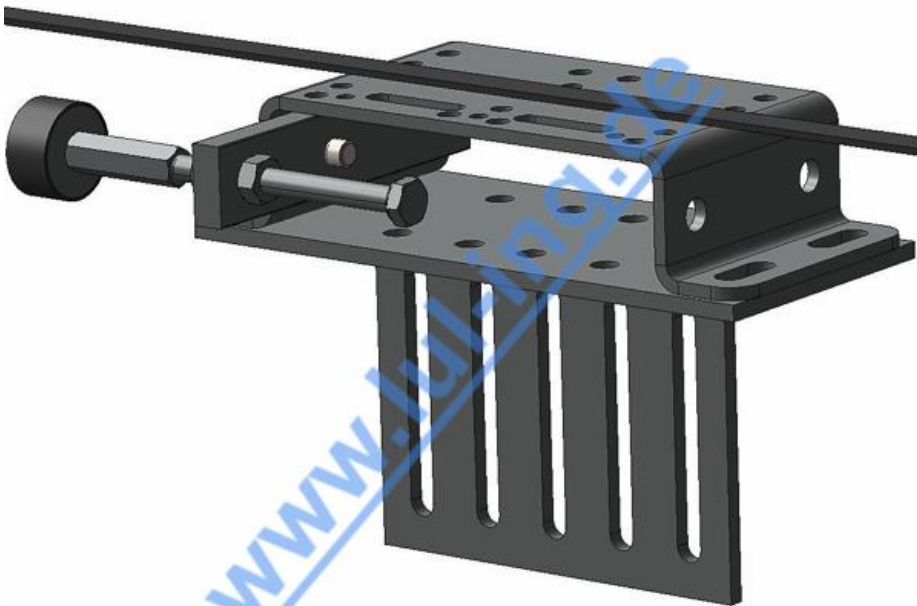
TSG in KONE ADE: centered buffer holder in central opening machine door
